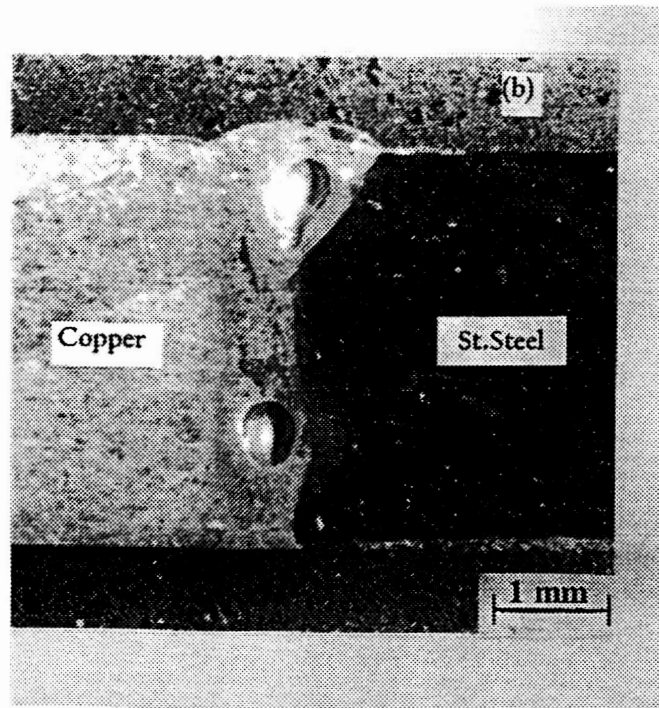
Cross-section of copper/stainless steel weld. Ambient air cover gas.
